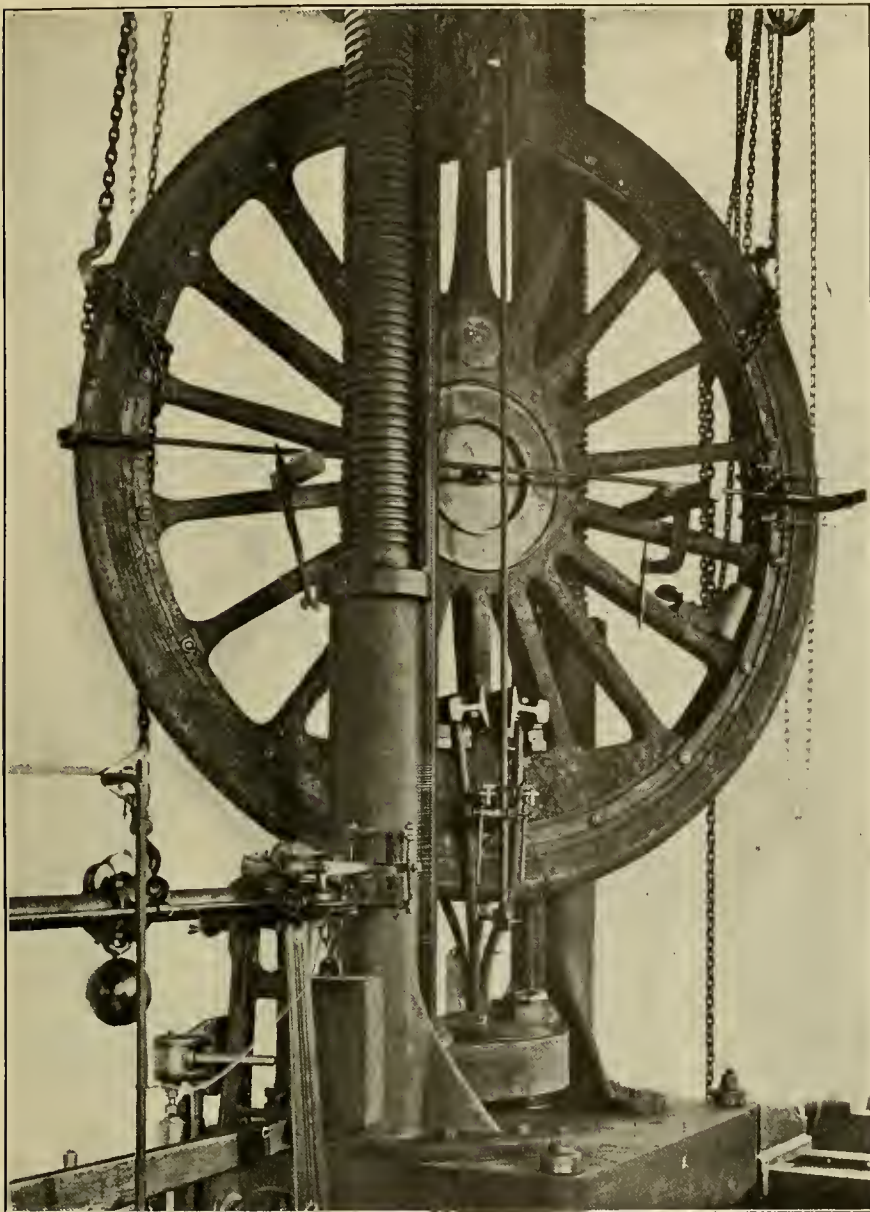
DRIVING WHEEL IN RIEHLE TESTING MACHINE.
